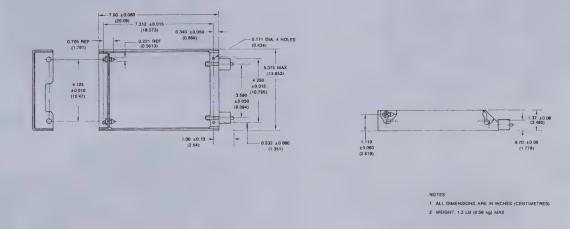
MT-4658/ARC-159(V) Mount, Outline and Mounting Dimensions
